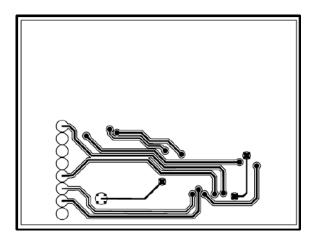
TCM5030 Reference Design PCB Layout Example - Layer 2
